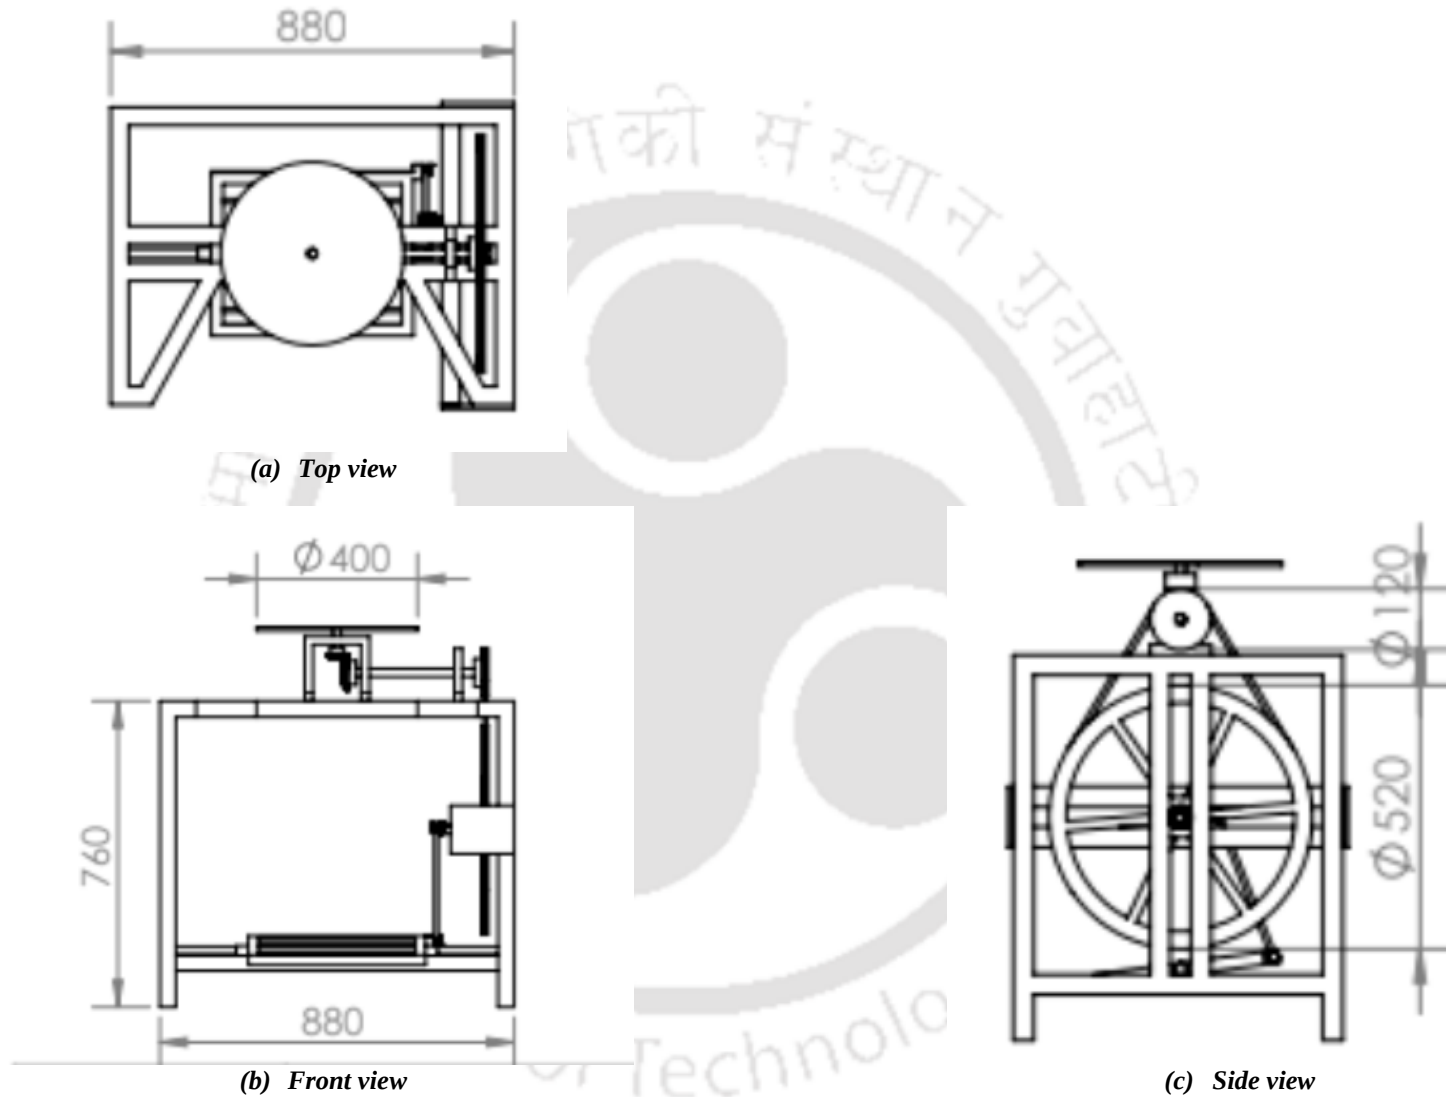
Two-Dimensional sketch representing the top view, front view and side view of IPC
